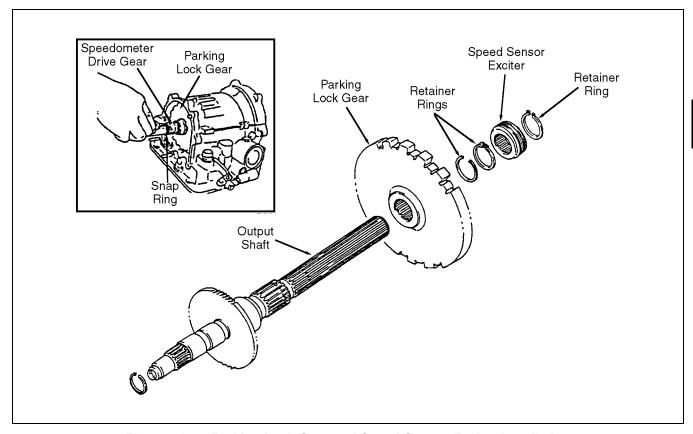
J-43. Parking Lock Gear and Speed Sensor Exciter Installation
